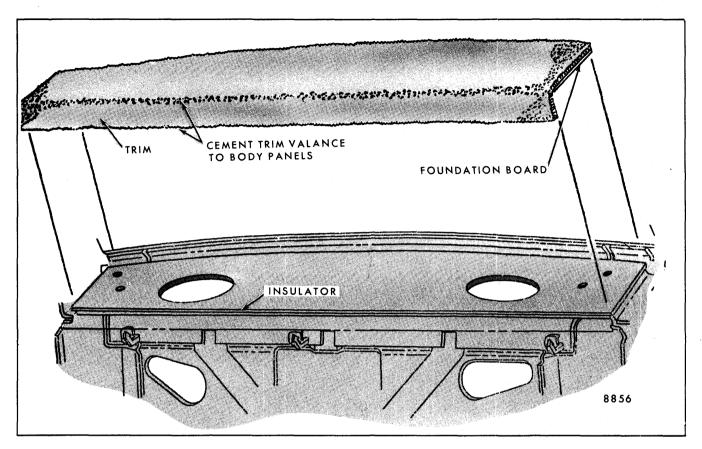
Rear Seat-to-Back Window Trim Panel
